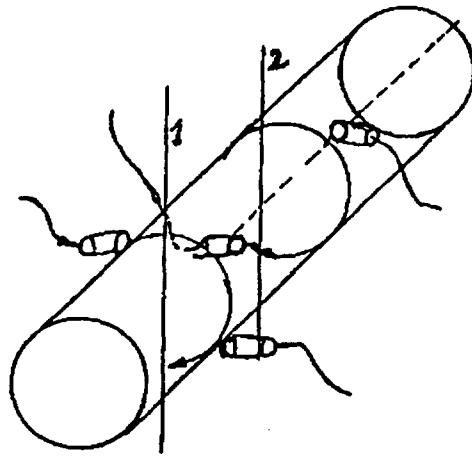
Testing method for longitudinal surface defects on rod material by the immersion technique with two pairs of TR probes.
